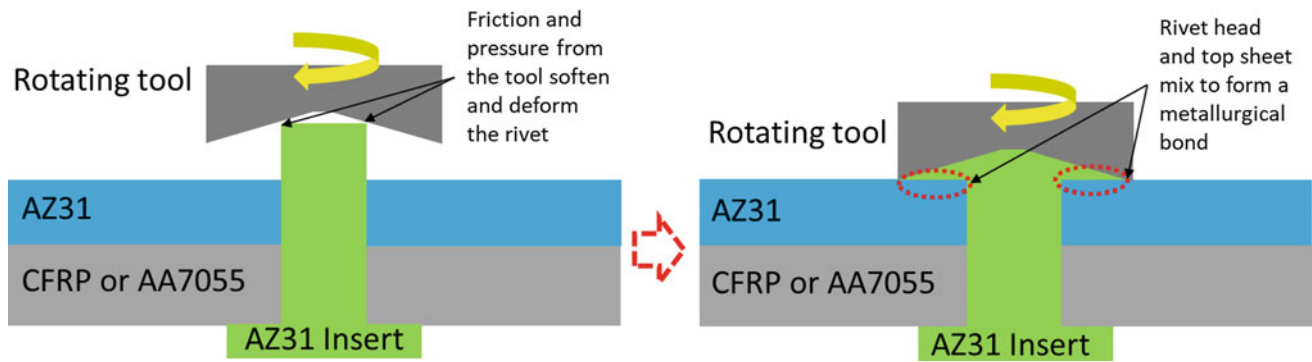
Mechanism and schematic of rotational hammer riveting technique
